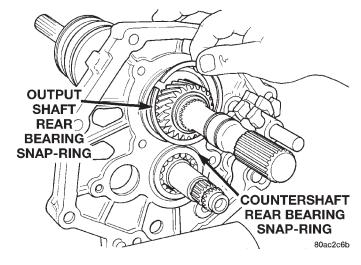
Remove Output Shaft Rear Bearing Snap-ring
